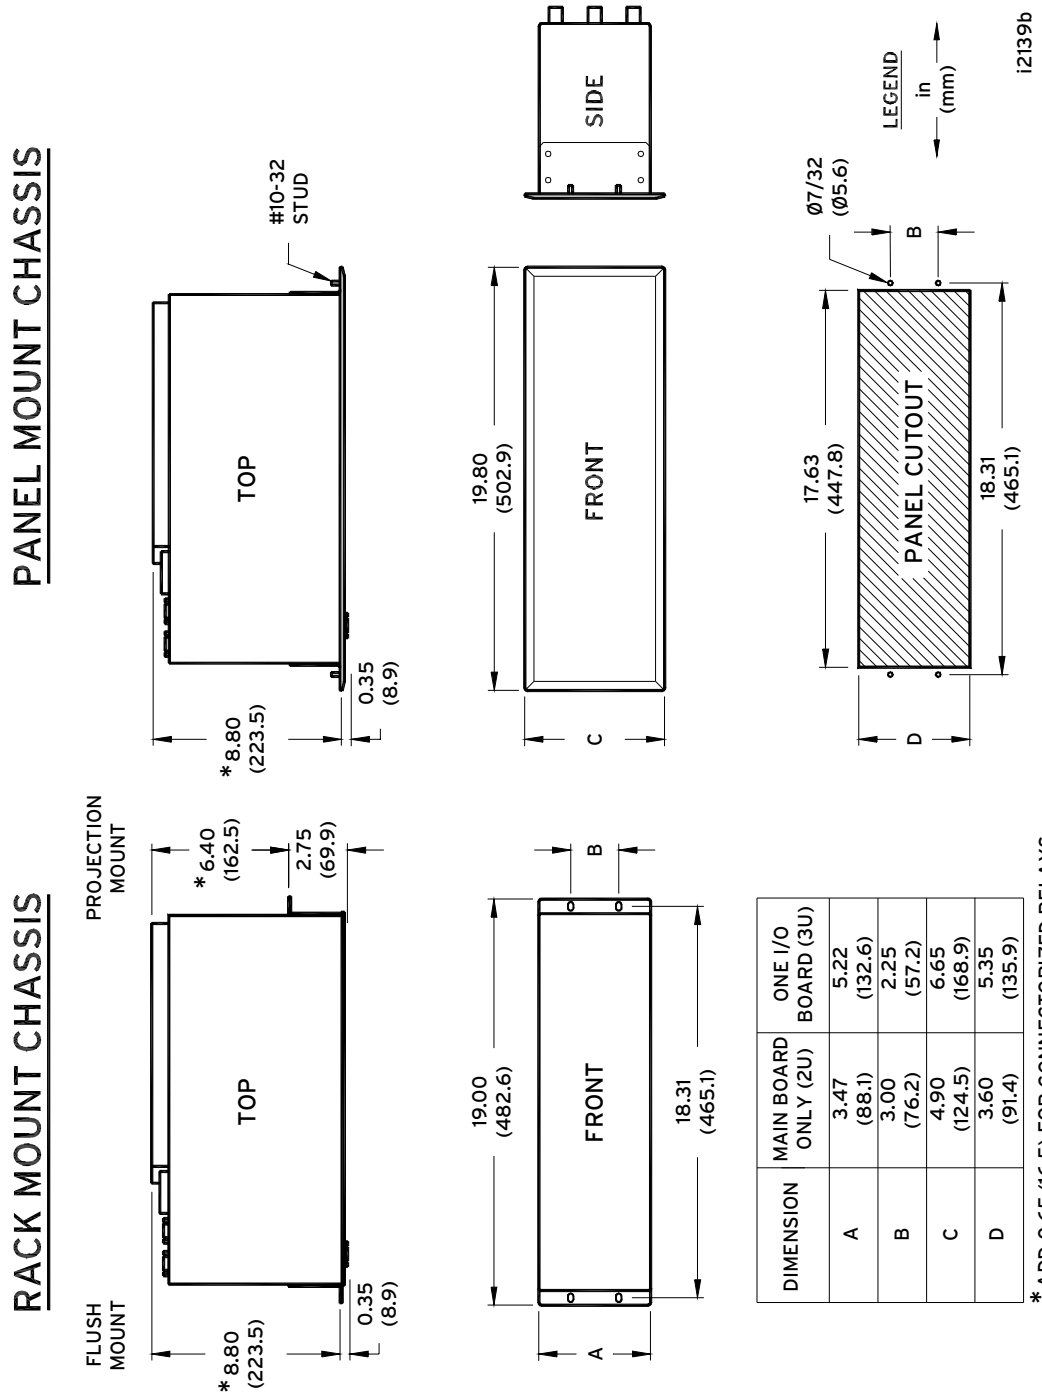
SEL-351 Relay Dimensions for Rack-Mount and Panel-Mount Models
